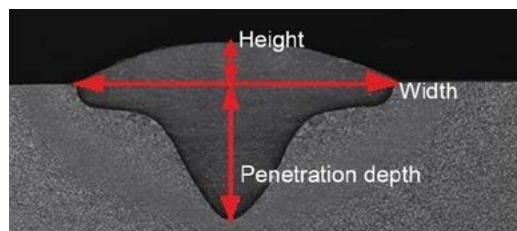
Manner of determining the overlay weld geometry and penetration depth
